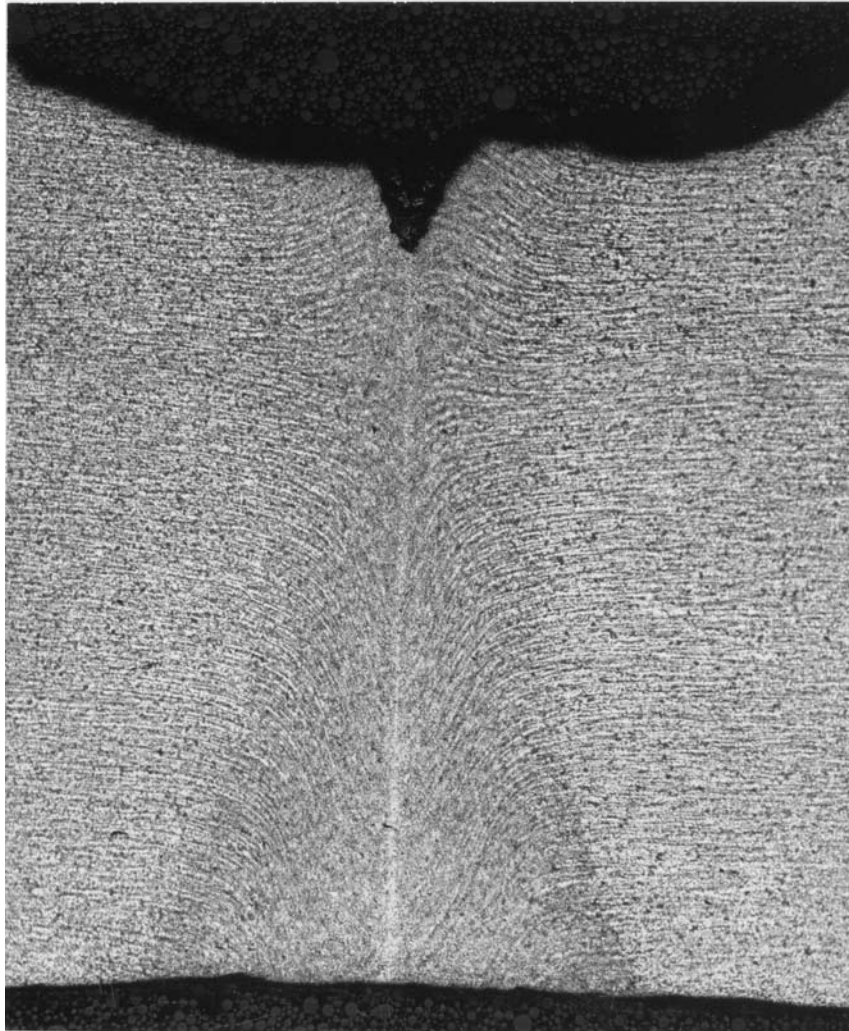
Selective Seam Corrosion with a Grooving Ratio of About 2 in a High-Frequency-Welded Seam
